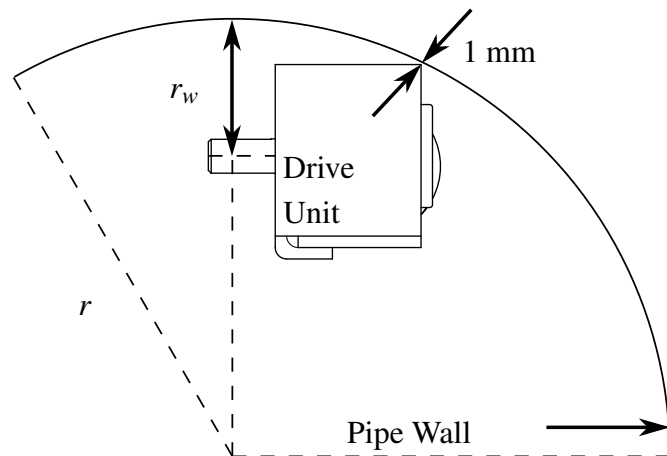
Diagram to show drive wheel radius selection to minimise size whilst giving 1 mm clearance
